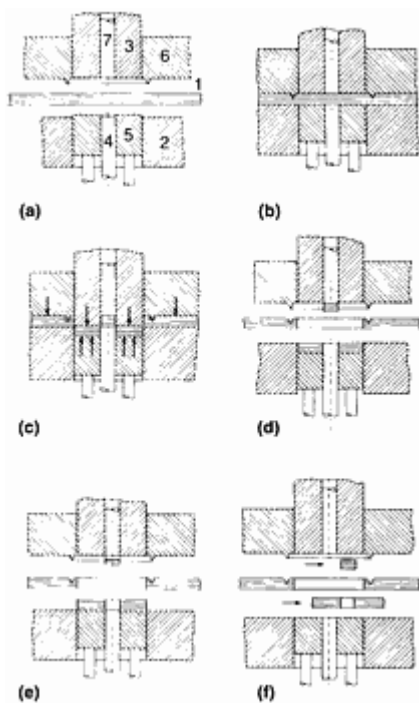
Typical tooling setup for fine-edge blanking a simple shape
